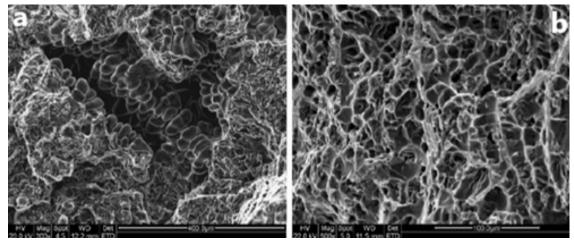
Fracture Morphology of Tensile Samples Obtained by a. Gravity casting, b. Vacuum pressure casting
